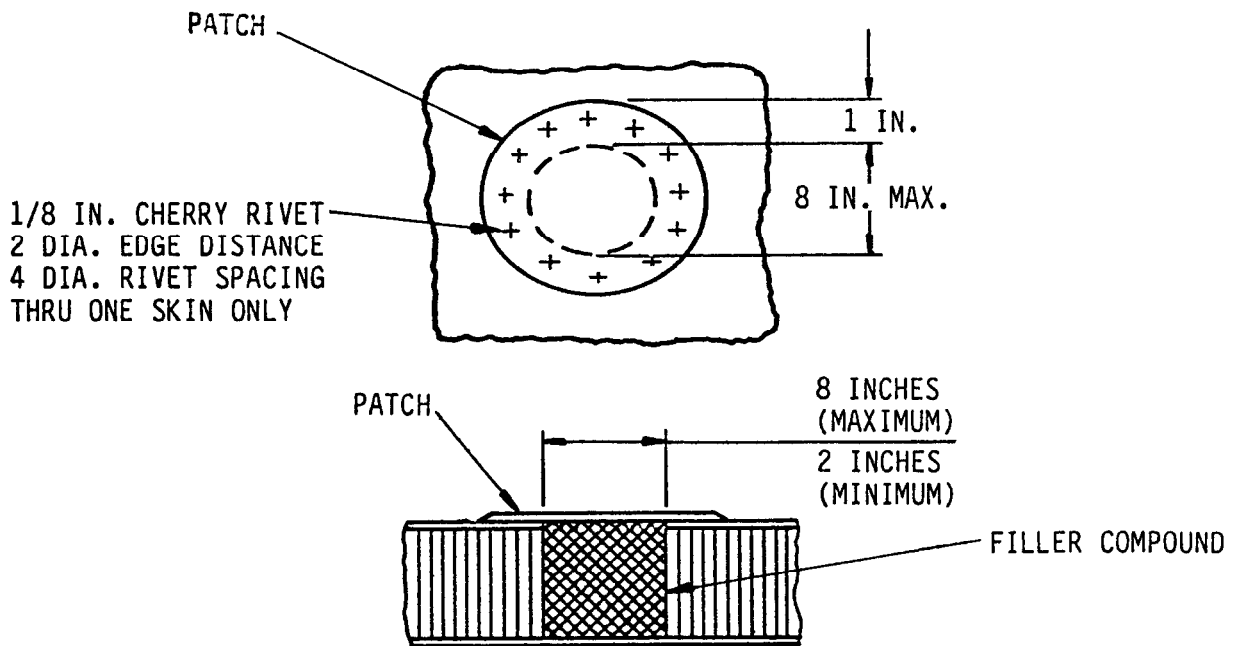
Repaired Honeycomb Core Panel, 2-8 Inch Damage-One Skin and Core
